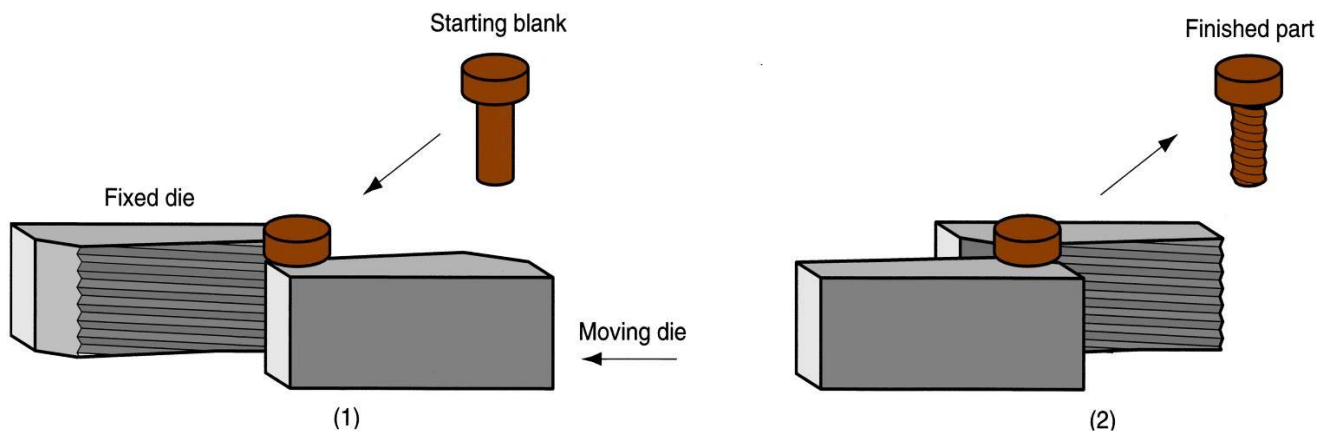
Thread rolling with flat dies: (1) start, and (2) end of cycle.
